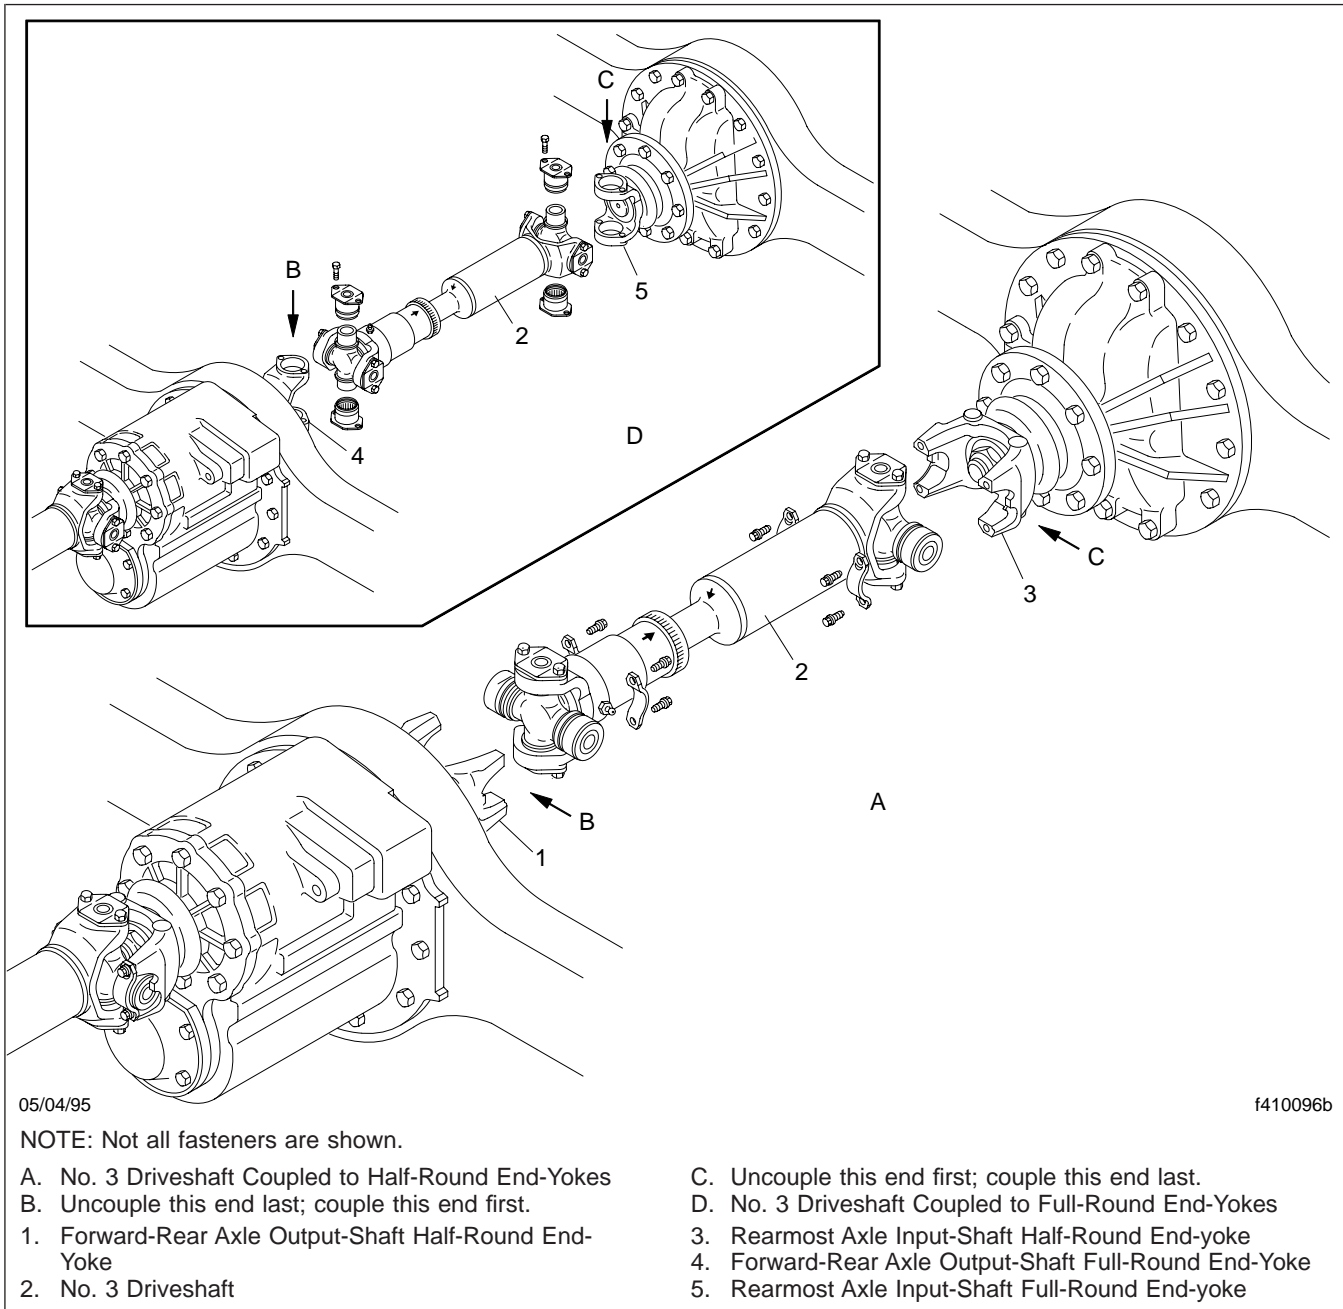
, Removal/Installation of a No. 3 Driveshaft Without RPL U-Joints
